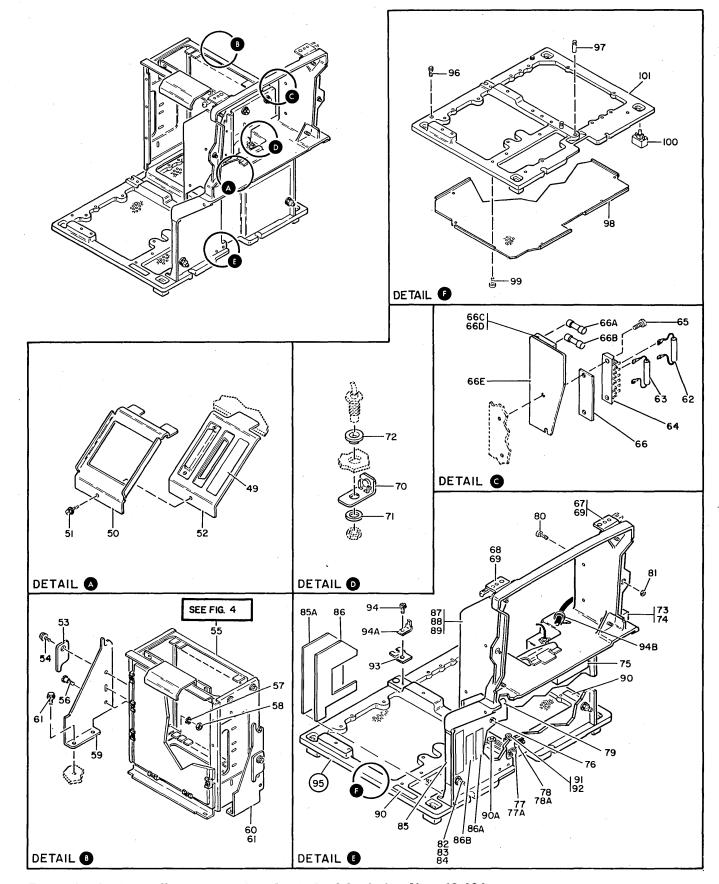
3277 M1 Final Assembly. Sheet 2 of 2. Index Nos. 49-101.
